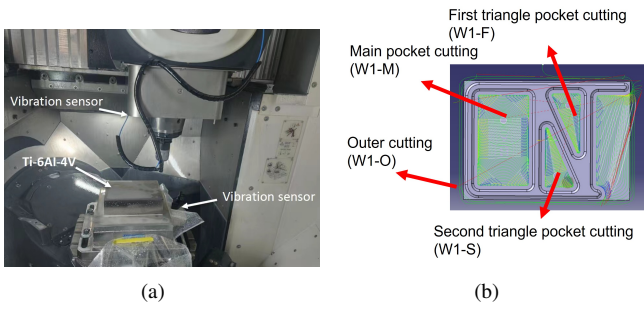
(a) View of the experimental setup and (b) A CAD drawing of a complete toolpath.
